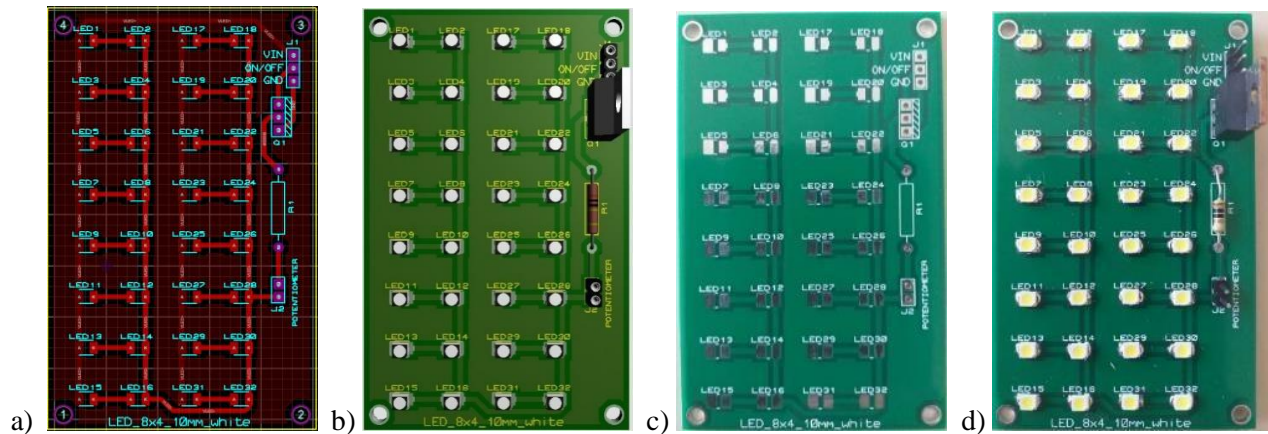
Light source unit: a) Design of PCB Layout using Proteus; b) 3D model of the Design; c) Manufactured PCB; d) Manufactured PCB with soldered components.
